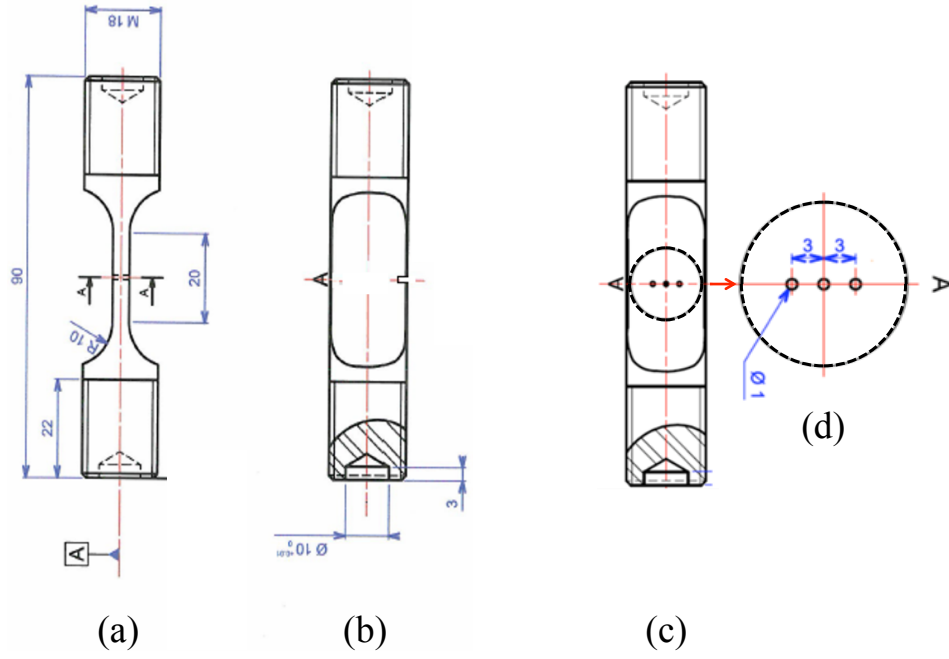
Specimens used for crack growth (a) side view common for both SENT and 3-holes specimens ; (b) SENT specimen ; (c) 3-holes specimen; (d) detailed view of three holes; dimensions are given in mm
